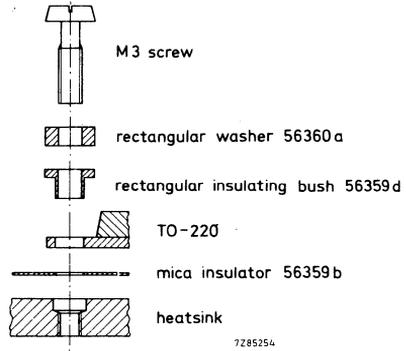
Insulated screw mounting with rectangular washer into tapped heatsink. Known as a "top mounting".
